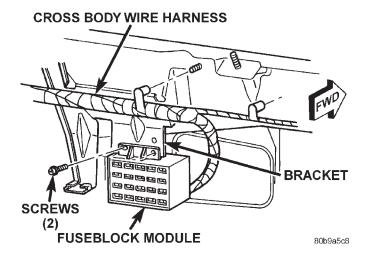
Fuseblock Module Remove/Install INSTALLATION
